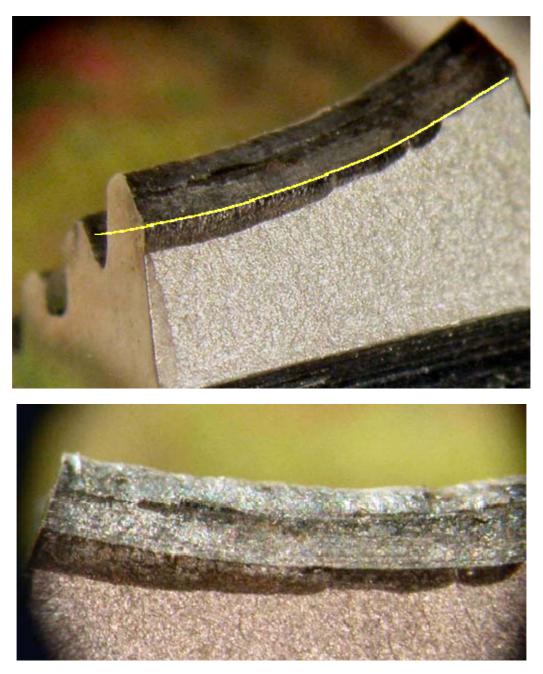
Free-laid crack surface. Yellow line indicates bottom of thread. The black occurring crack surface has the macroscopic appearance of fatigue cracking.
